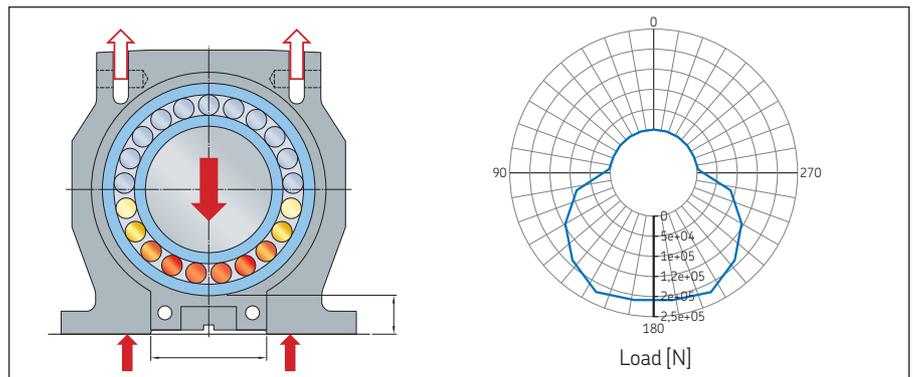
Optimized bearing housing design (optimized gap width, housing thickness and key size).
